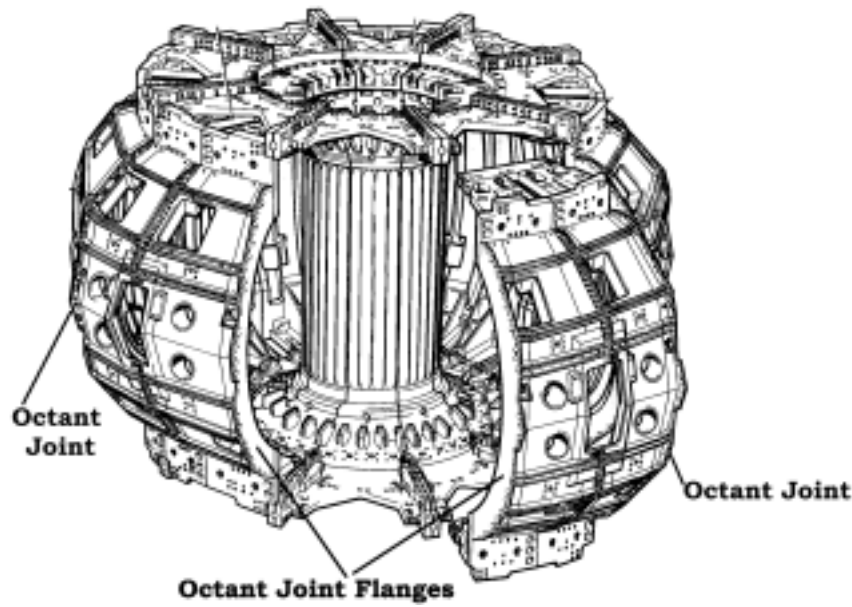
Geometry and basic principle of assembly of the mechanical structure
